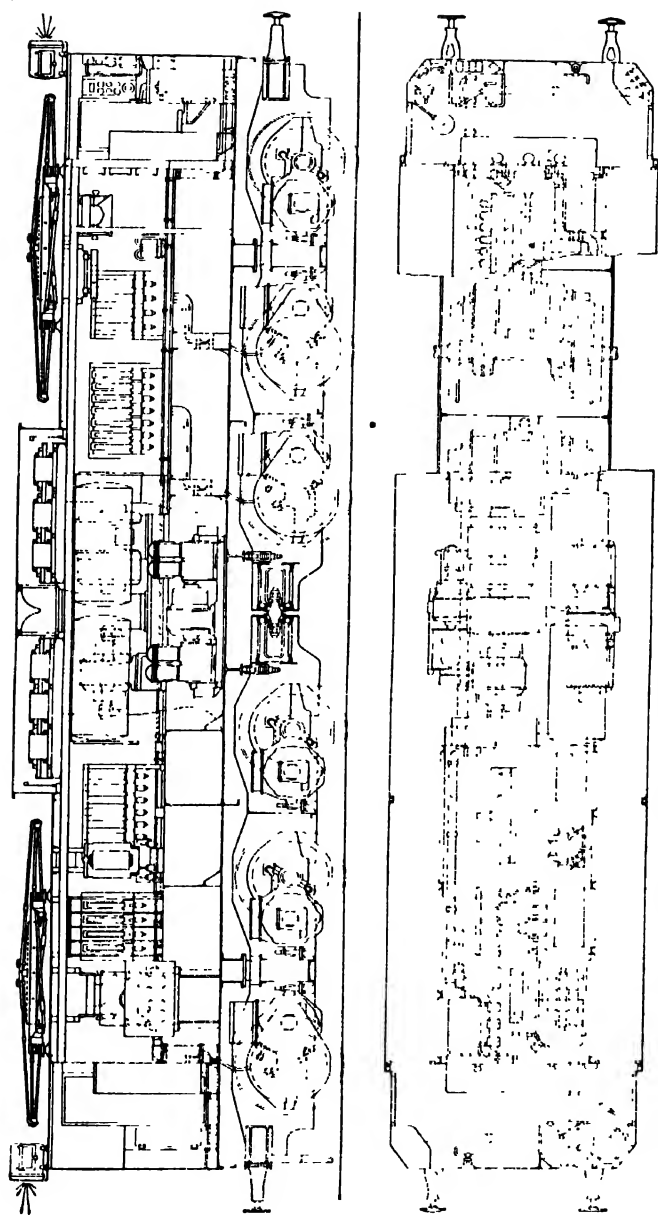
General Arrangement of Electrical Equipment on Locomotive illustrated in Fig. 323 (Oerlikon).
